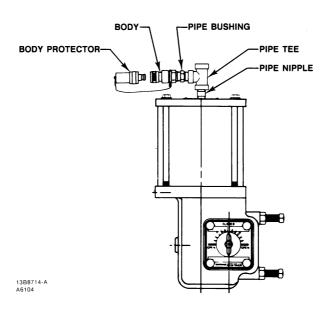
Type 1066, 1066SR Piston Rotary Actuator
